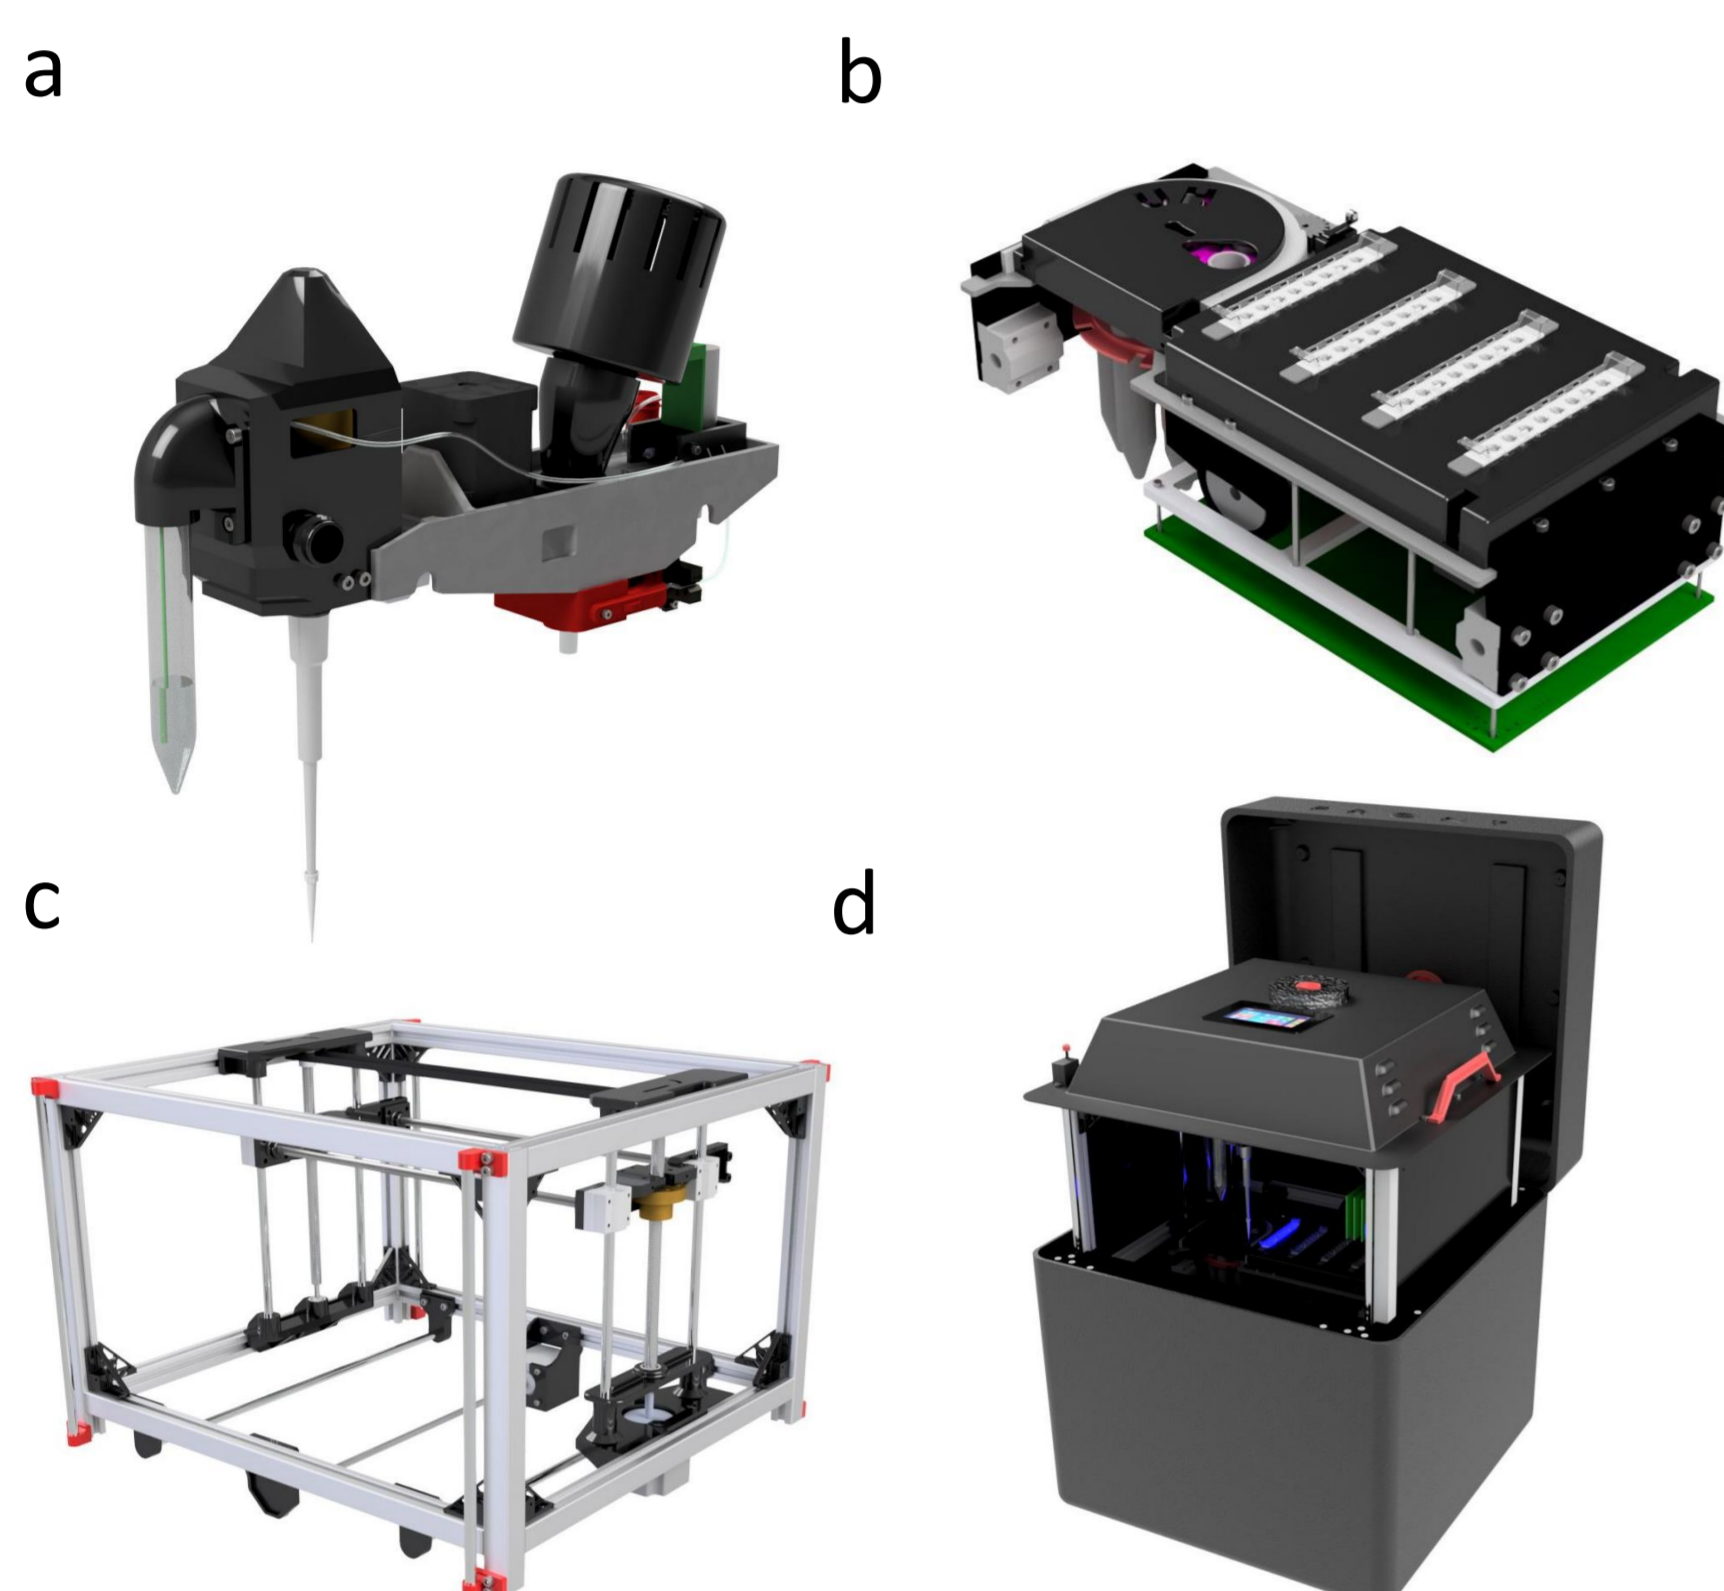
a) Top Assembly with cyclone, b) Base Assembly with LAMP units, c) Chassis Assembly, d) Packaged Assembly
